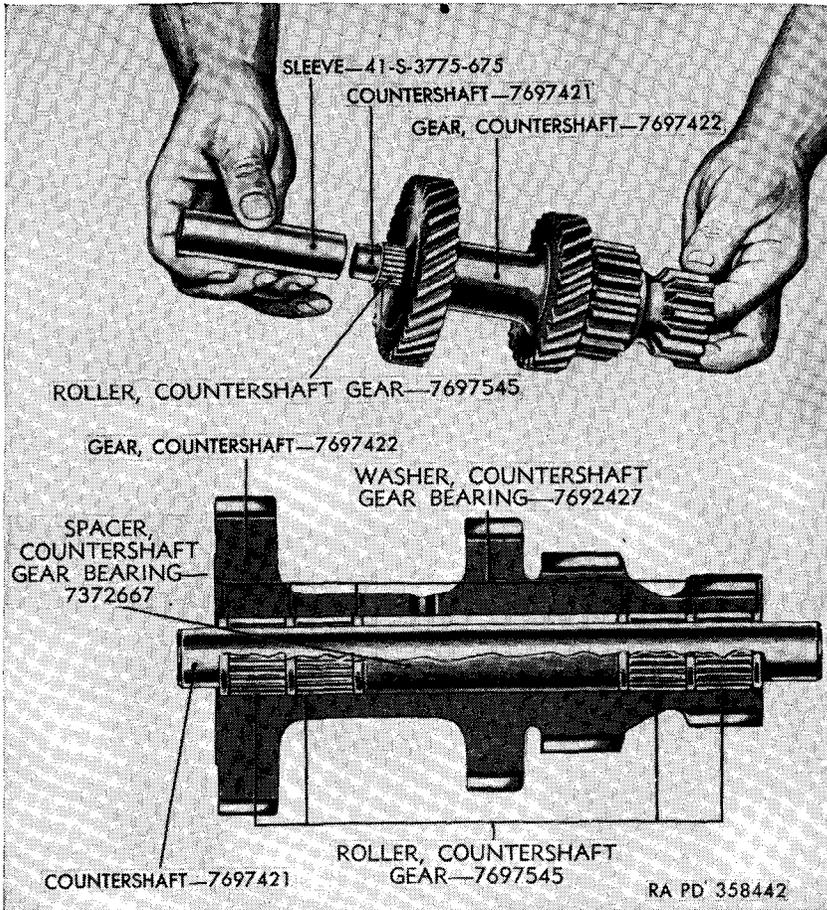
Seating countershaft gear rollers and washers, using sleeve 41-S-3775-675.
